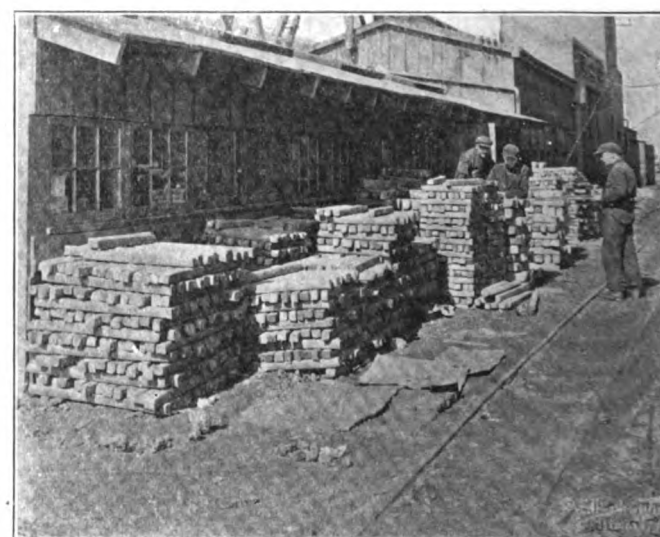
Stockyard, showing piles of 6-inch chipped billets ready to be forged into rings.
